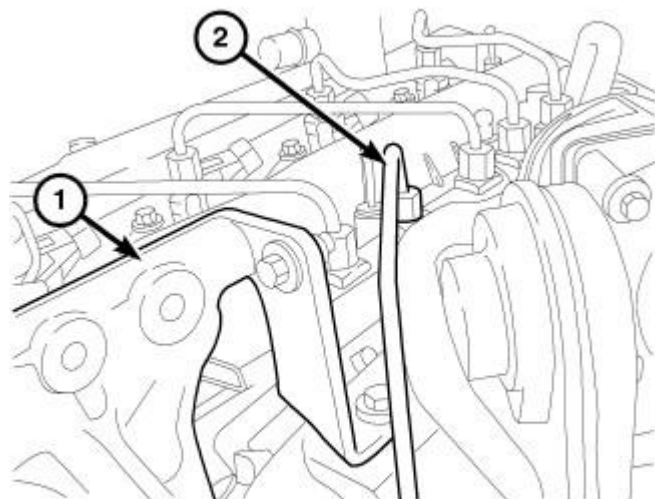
GENERATOR BRACKET SUPPORT & BOLTS
